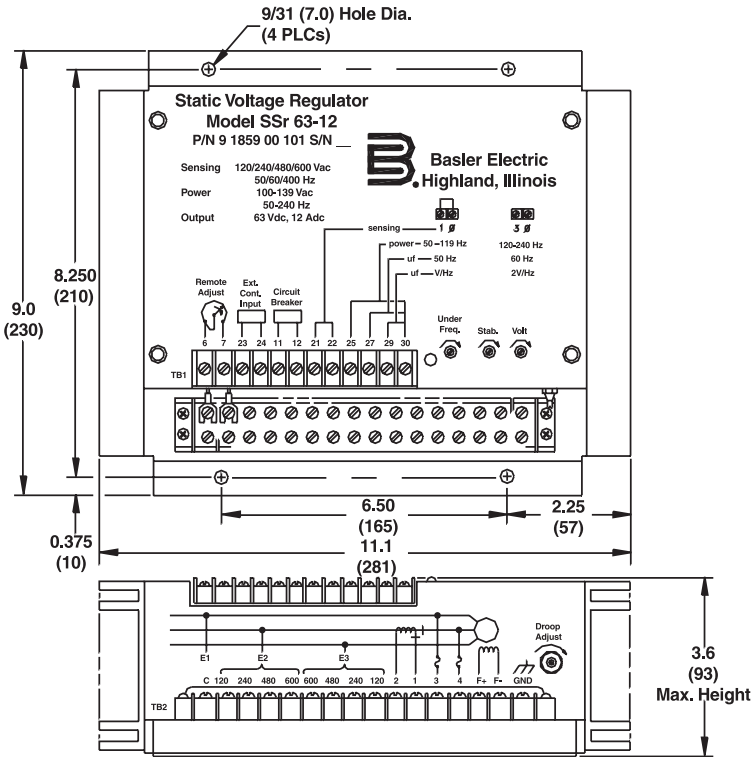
TYPICAL OUTLINE DRAWING, SSR
